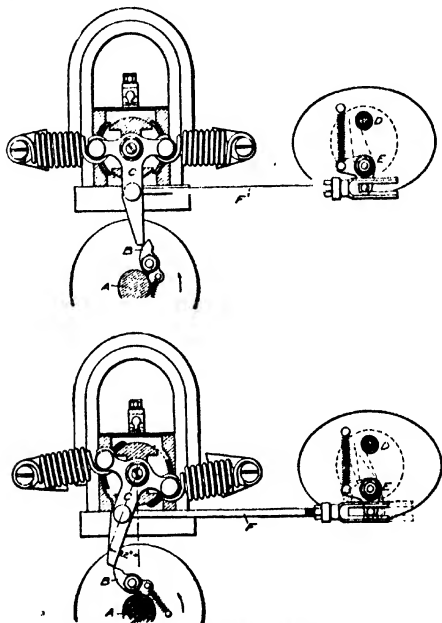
Bosch-Simms Oscillating Magneto of Inductor Type. Top View in Position of Rest; Bottom View Just before Tripping
